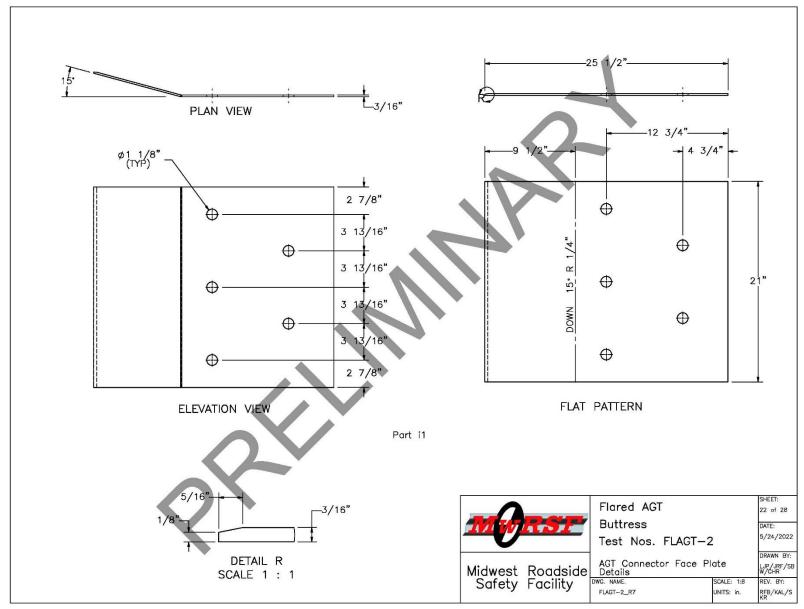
AGT Connector Face Plate Details, Test No. FLAGT-2
